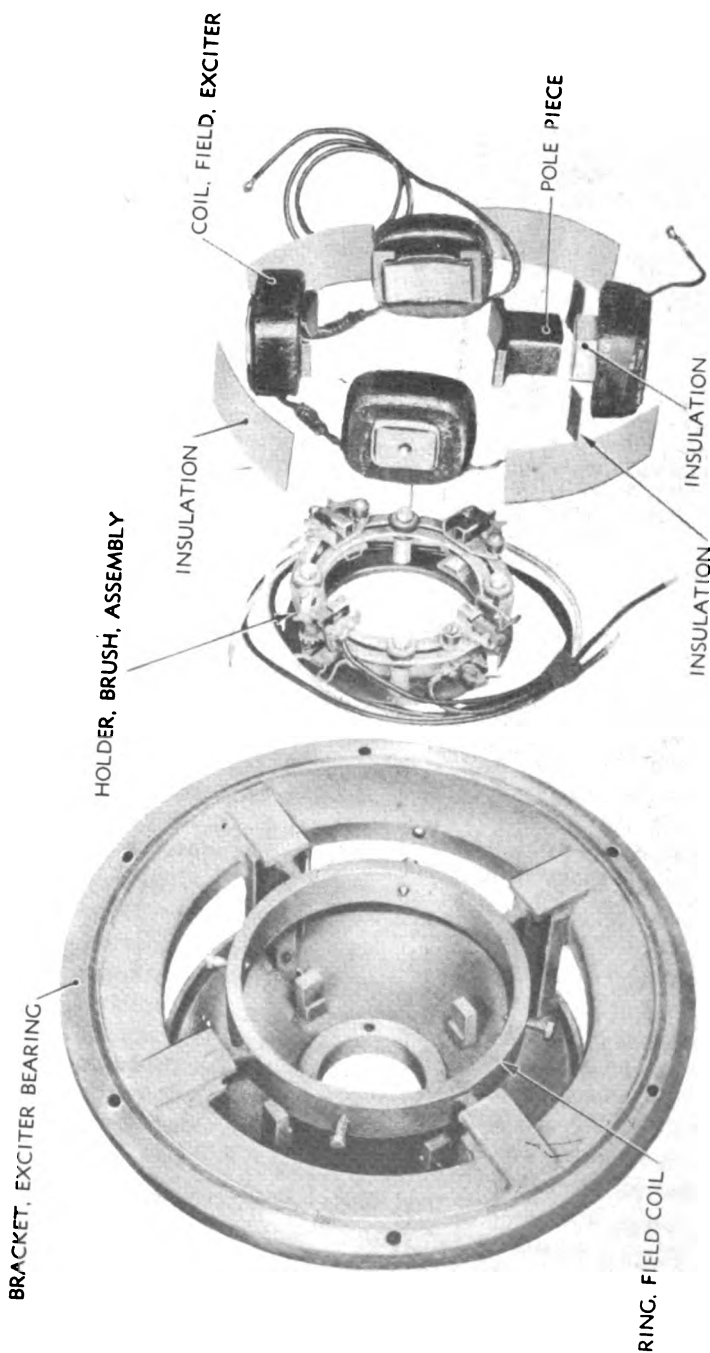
Exciter Bearing Bracket with Coils and Brush-holder Ring Assembly Removed
